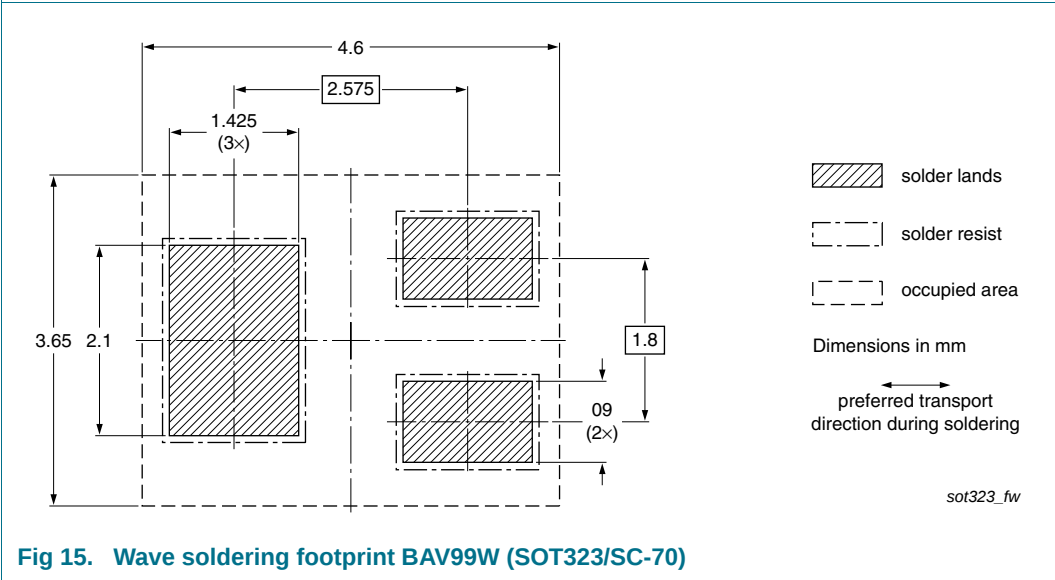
Wave soldering footprint BAV99W (SOT323/SC-70)
